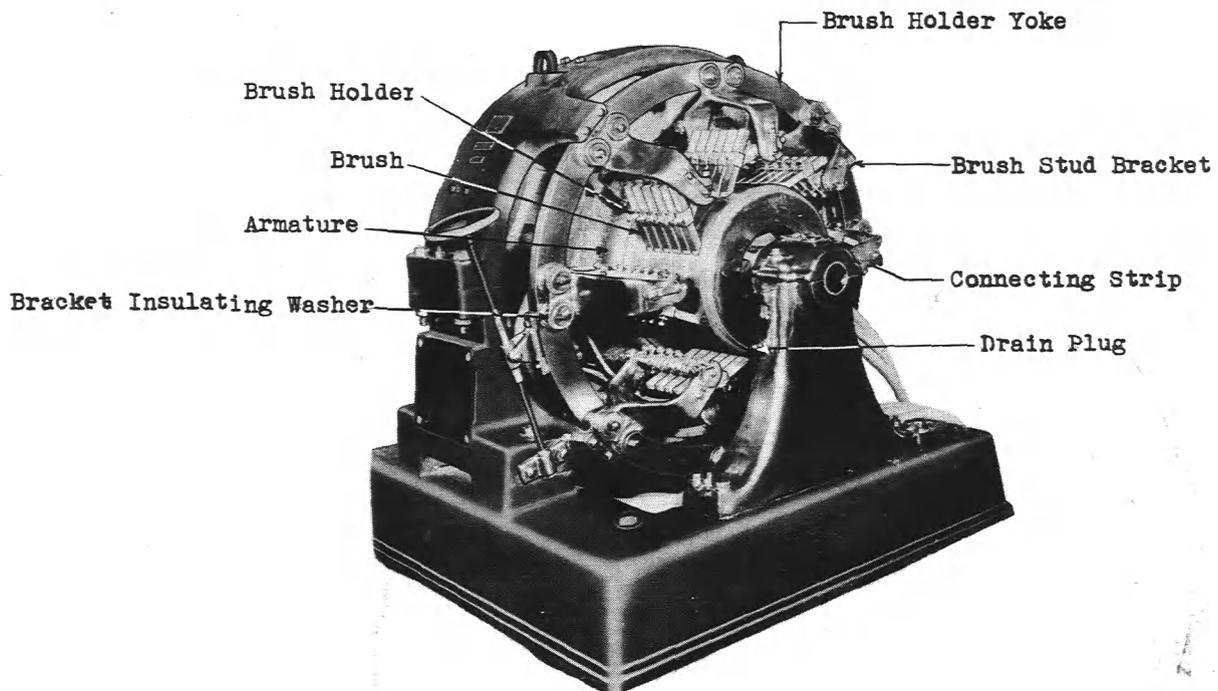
M-15 GENERATOR (FRAME MOUNTED BRUSH RIGGING)
